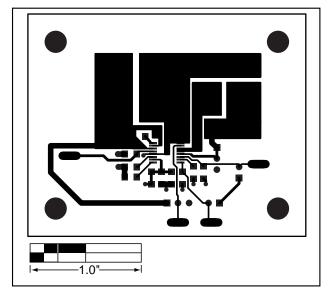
MAX1685 EV Kit PC Board Layout—Component Side
